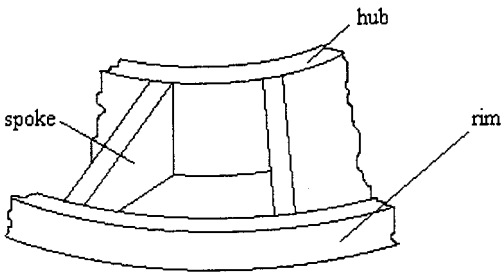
Quadrilateral-shaped section of rotor support casting.
